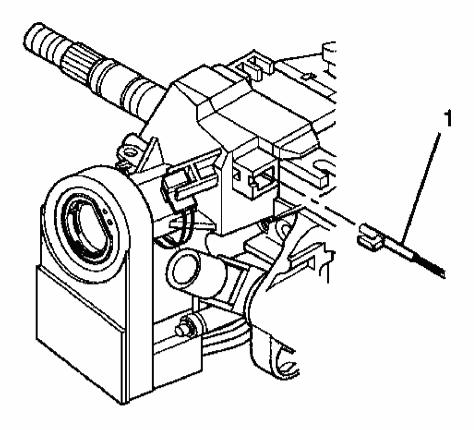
Identifying Park Lock Cable At Ignition Lock Cylinder Courtesy of GENERAL MOTORS CORP.
